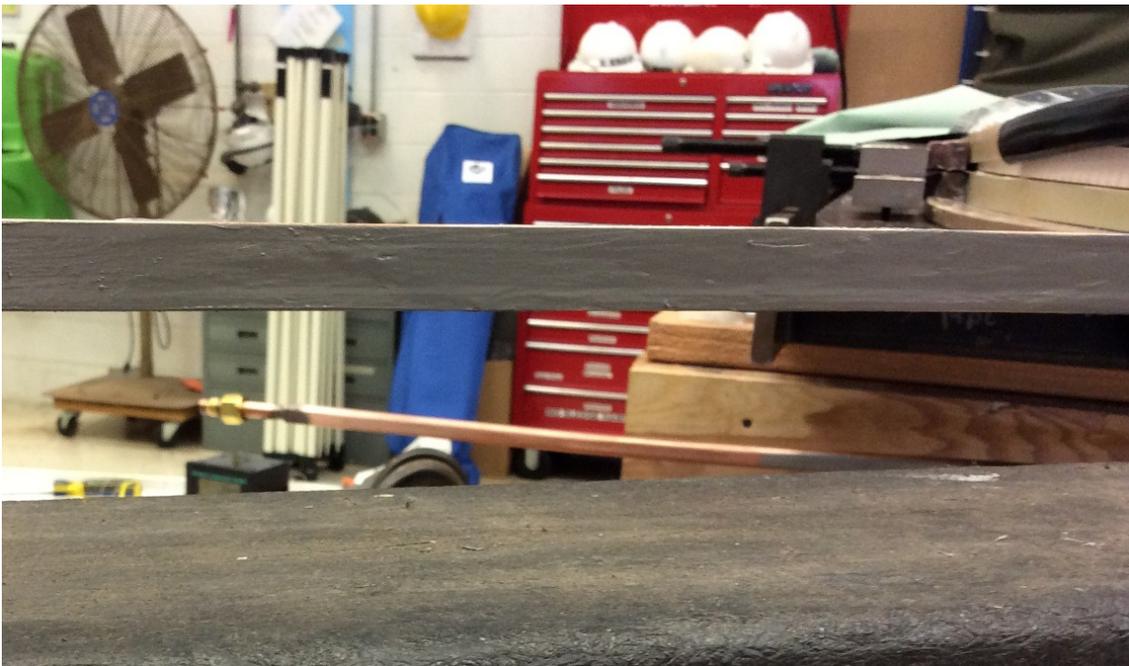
Superconductive cable and stabilizer, held at the bottom, appropriately pasted with ChipQuik. The cable must be inserted in the soldering fixture before the stabilizer
